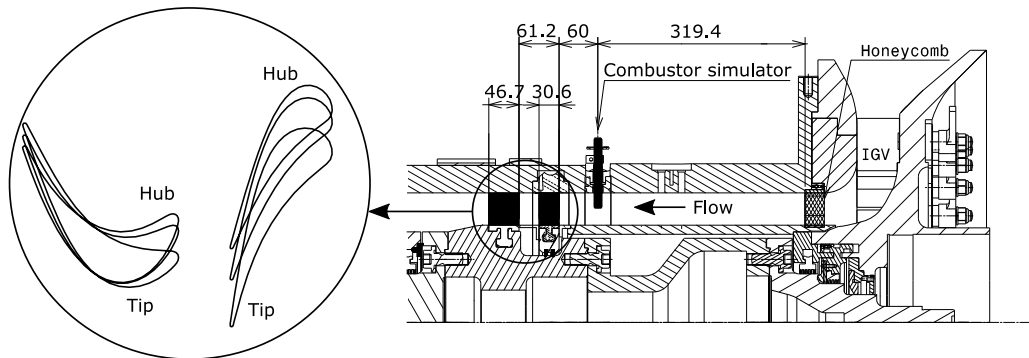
Turbine meridional plane and blade geometry detail. Dimensions are expressed in millimeters.
